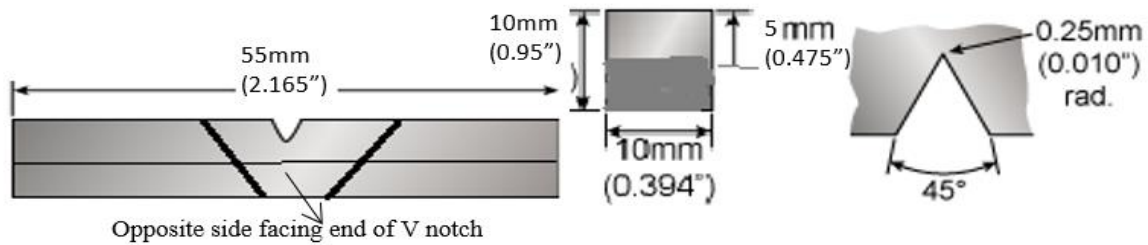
Specification of Charpy test samples (a) frontal view, (b) side view and (c) V notch
